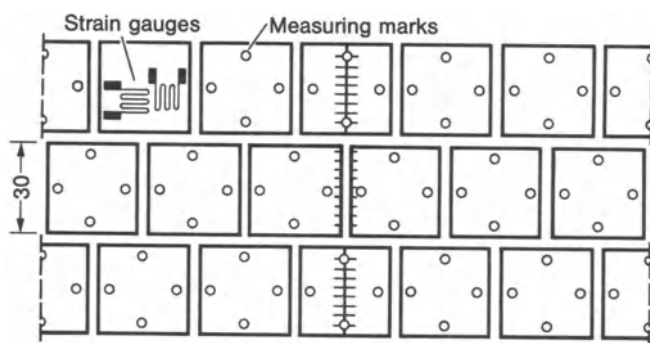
Block-cutting method applied on plate with butt weld; after Vinokurov [8]
